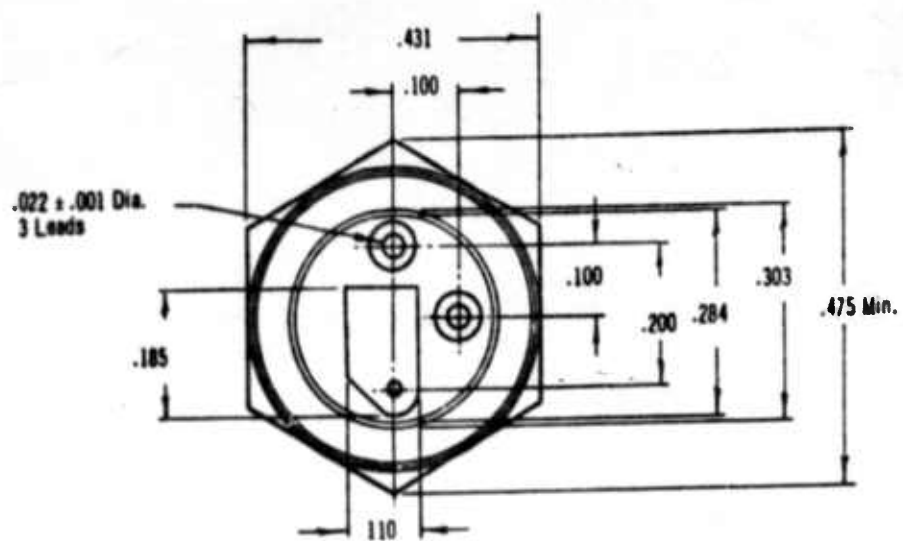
HEADER ASSEMBLY ISOLATED COLLECTOR
